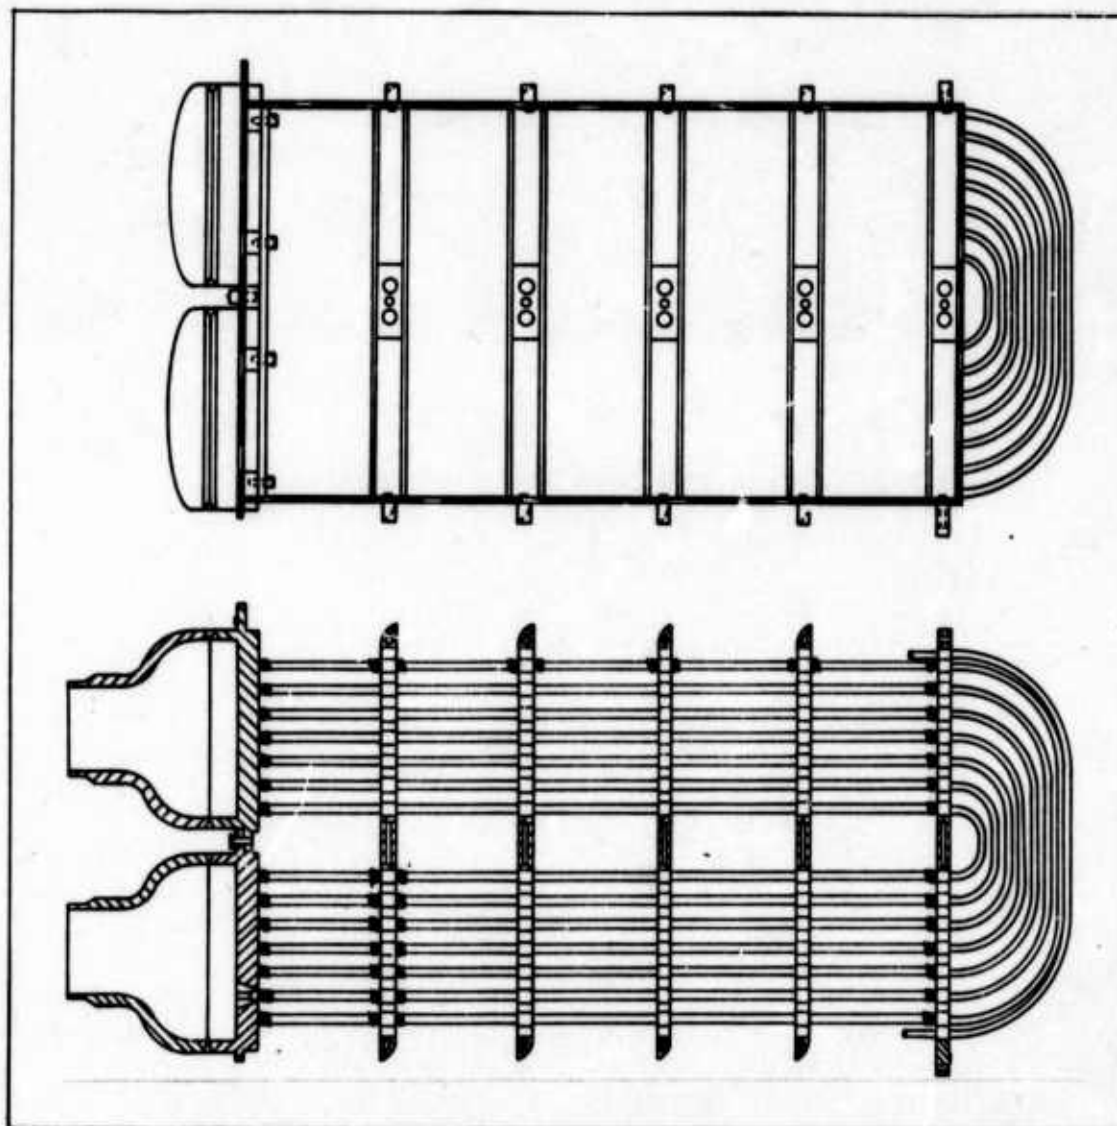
Cross Sectional View of U-Tube Arrangement (Ref. 111, p. 29)
